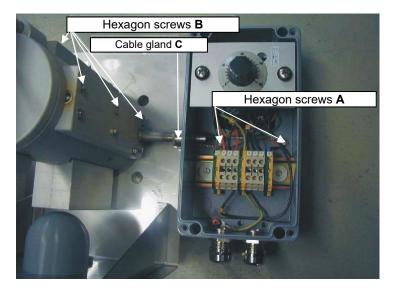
Position of fixing screws of connection box, thermostat sensor and heating cartridge carrier plate
